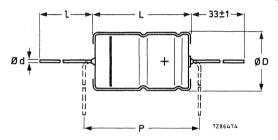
Style 1; see Table 1a for dimensions d, D, L, I and P.
